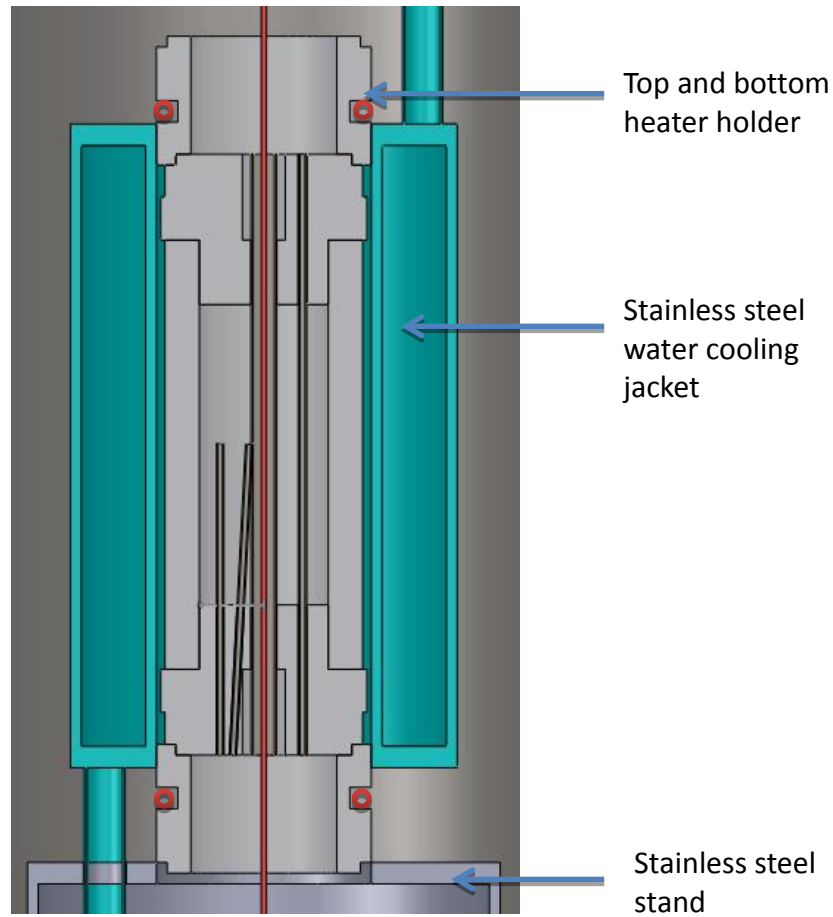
Cross section of assembly of crucible container and water cooling jacket
